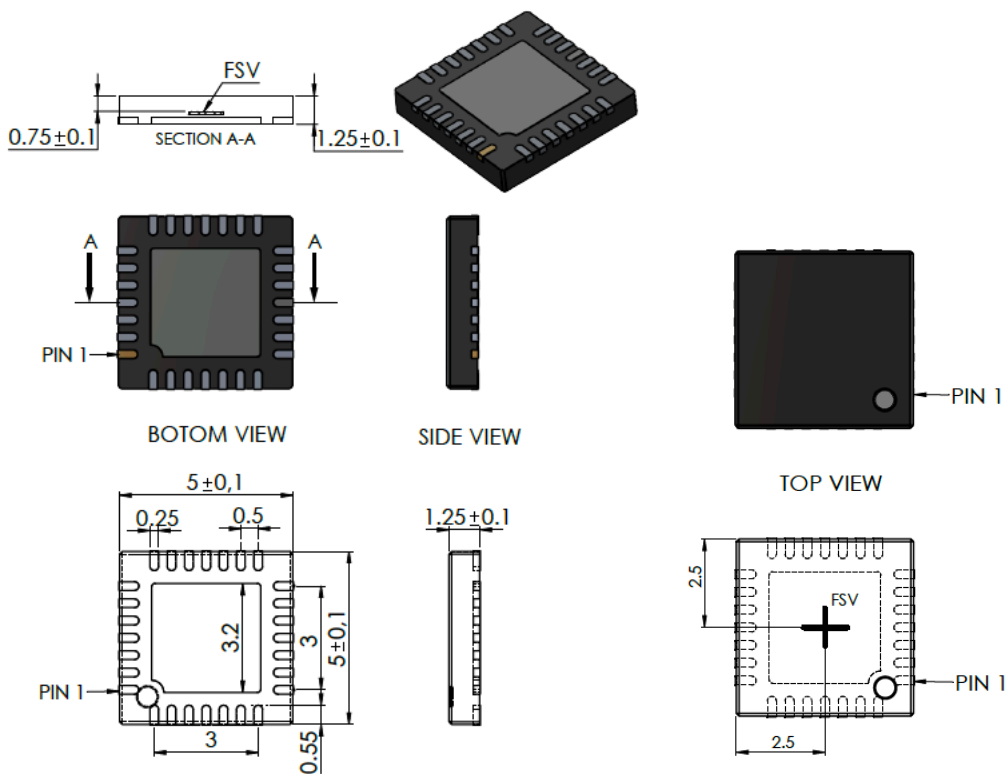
Dimensions of QFN 5x5 mm<sup>2</sup> package with 28 pads. The field sensitive volume (FSV) is located at the center of the package. Not to scale
